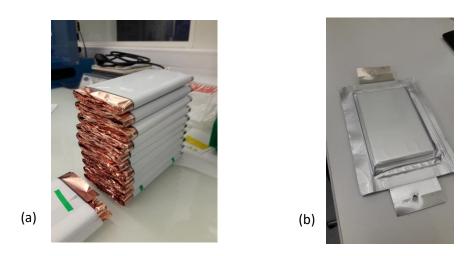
GEN#2A cells: a) Winded assemblies, b) Cell with final soft packaging
